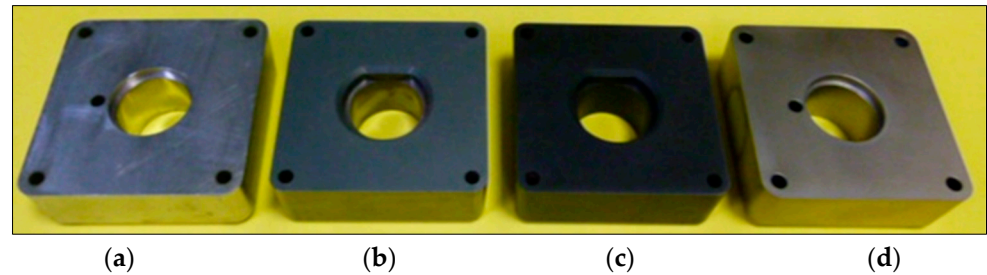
Mold inserts: (a) uncoated; (b) coated with CrAlSiN; (c) coated with TiAlN; and (d) coated with TiN.
